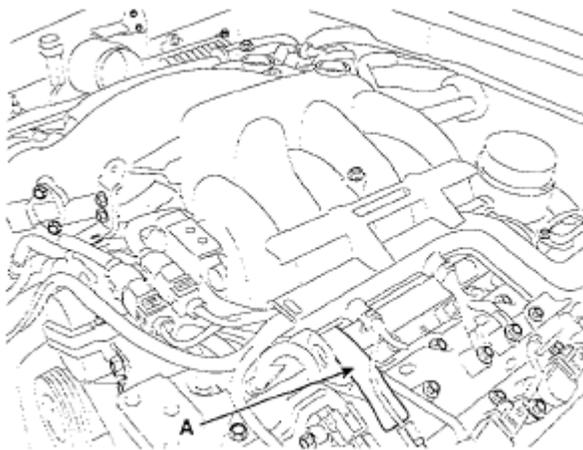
Identifying MAF Sensor Connector And Air Cleaner Assembly
